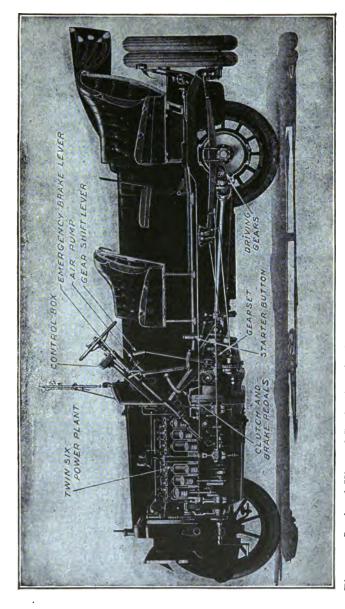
Sectional View of Packard Twin Six Chassis, Showing Power Generating, Speed Changing and Power Transmission Parts.
